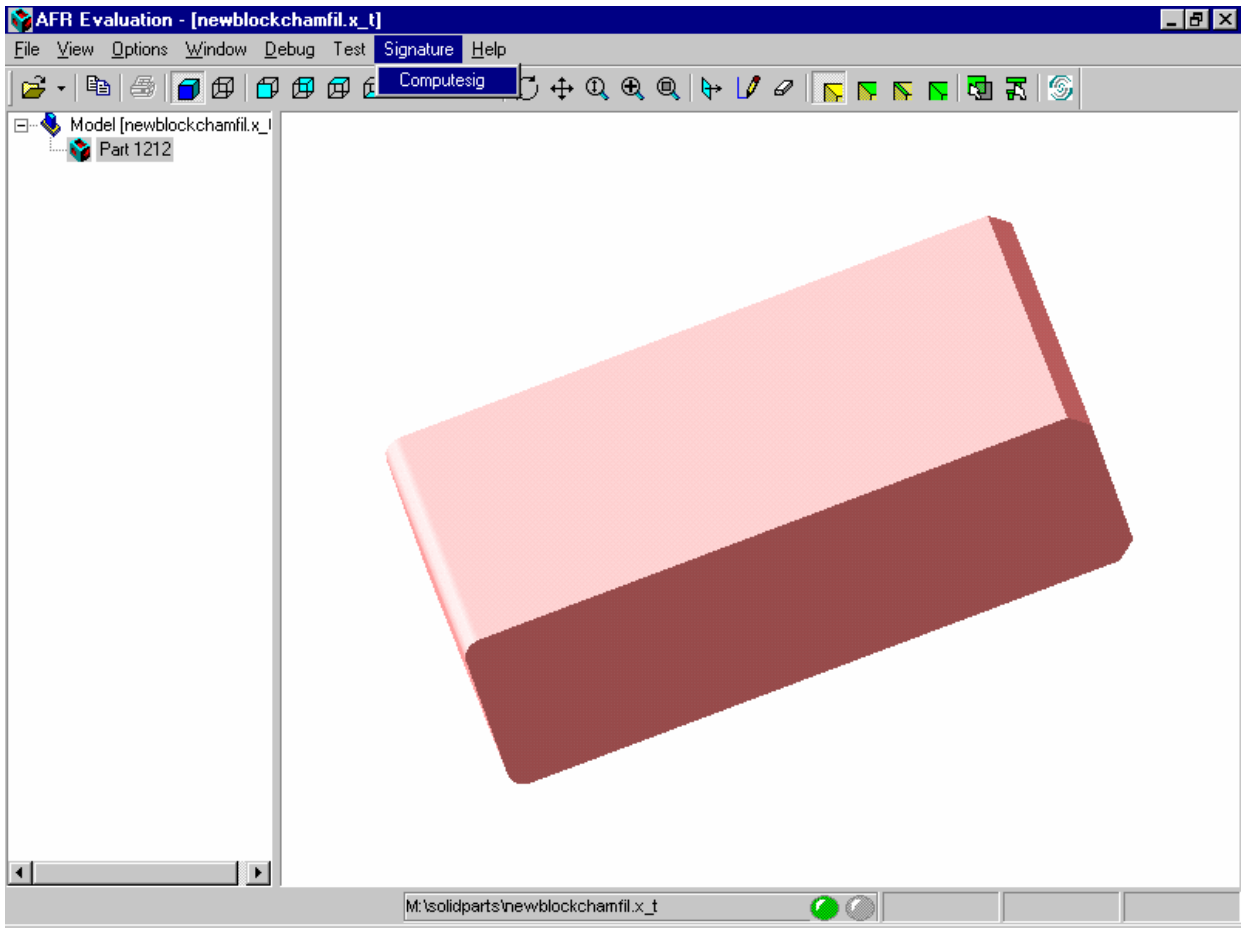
BLOCK WITH FILLET AND CHAMFER
